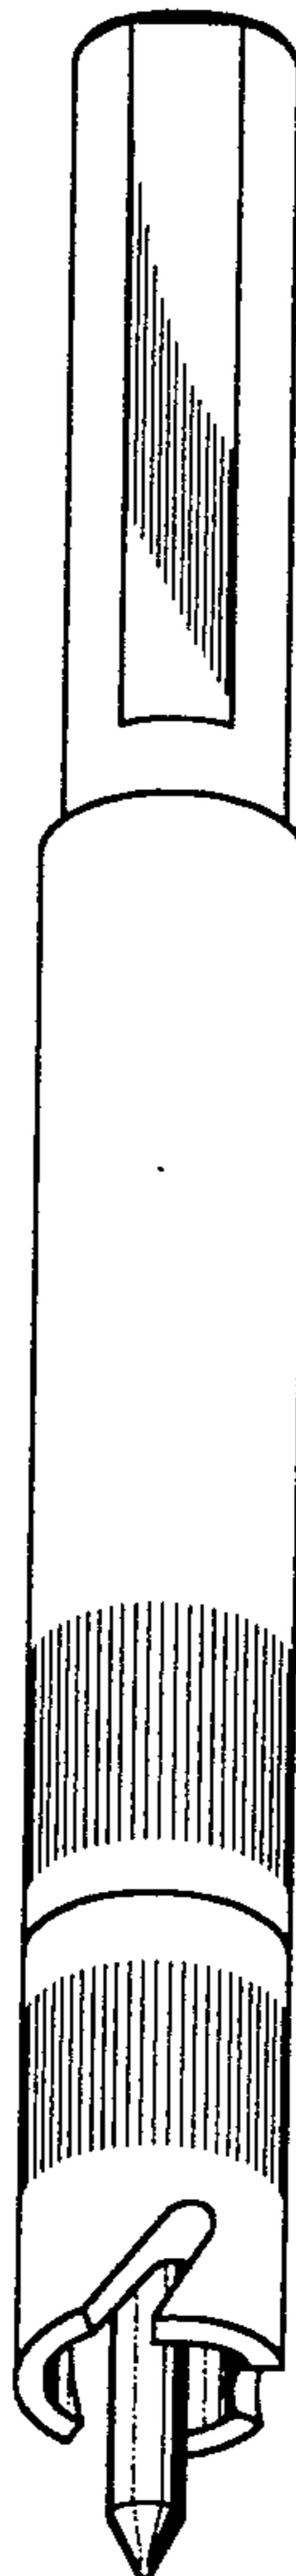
is a front left side perspective view of a hole cutter showing my new design;
